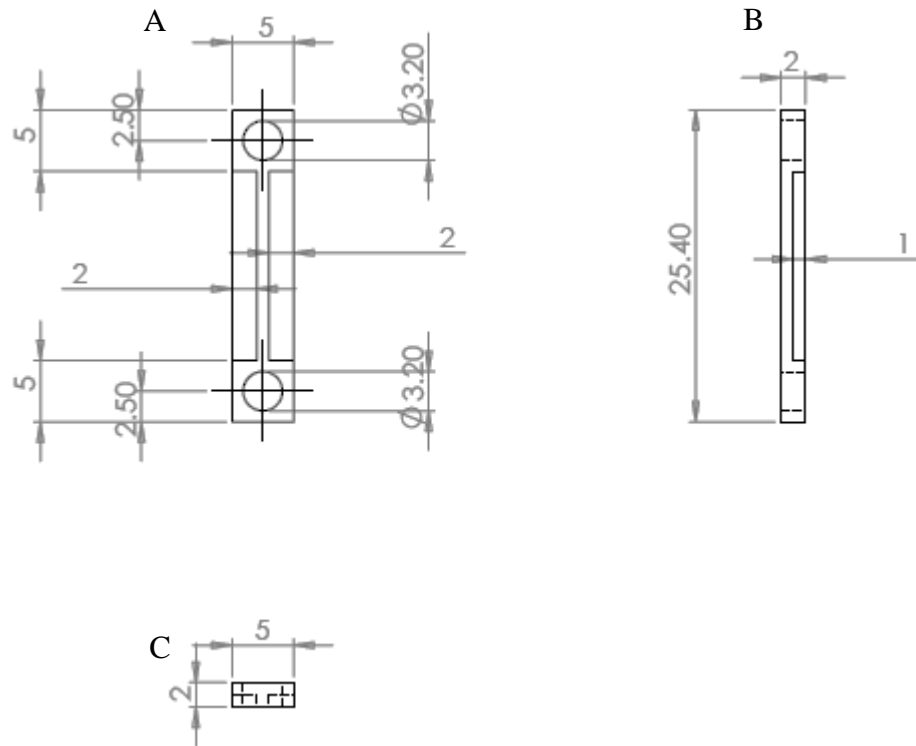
An Aluminum pole drawing in mm scale, (A) front view, (B) side view and (C) top view.
